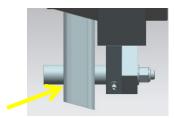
Clamp Ring Pivot Plate Weld Locations
